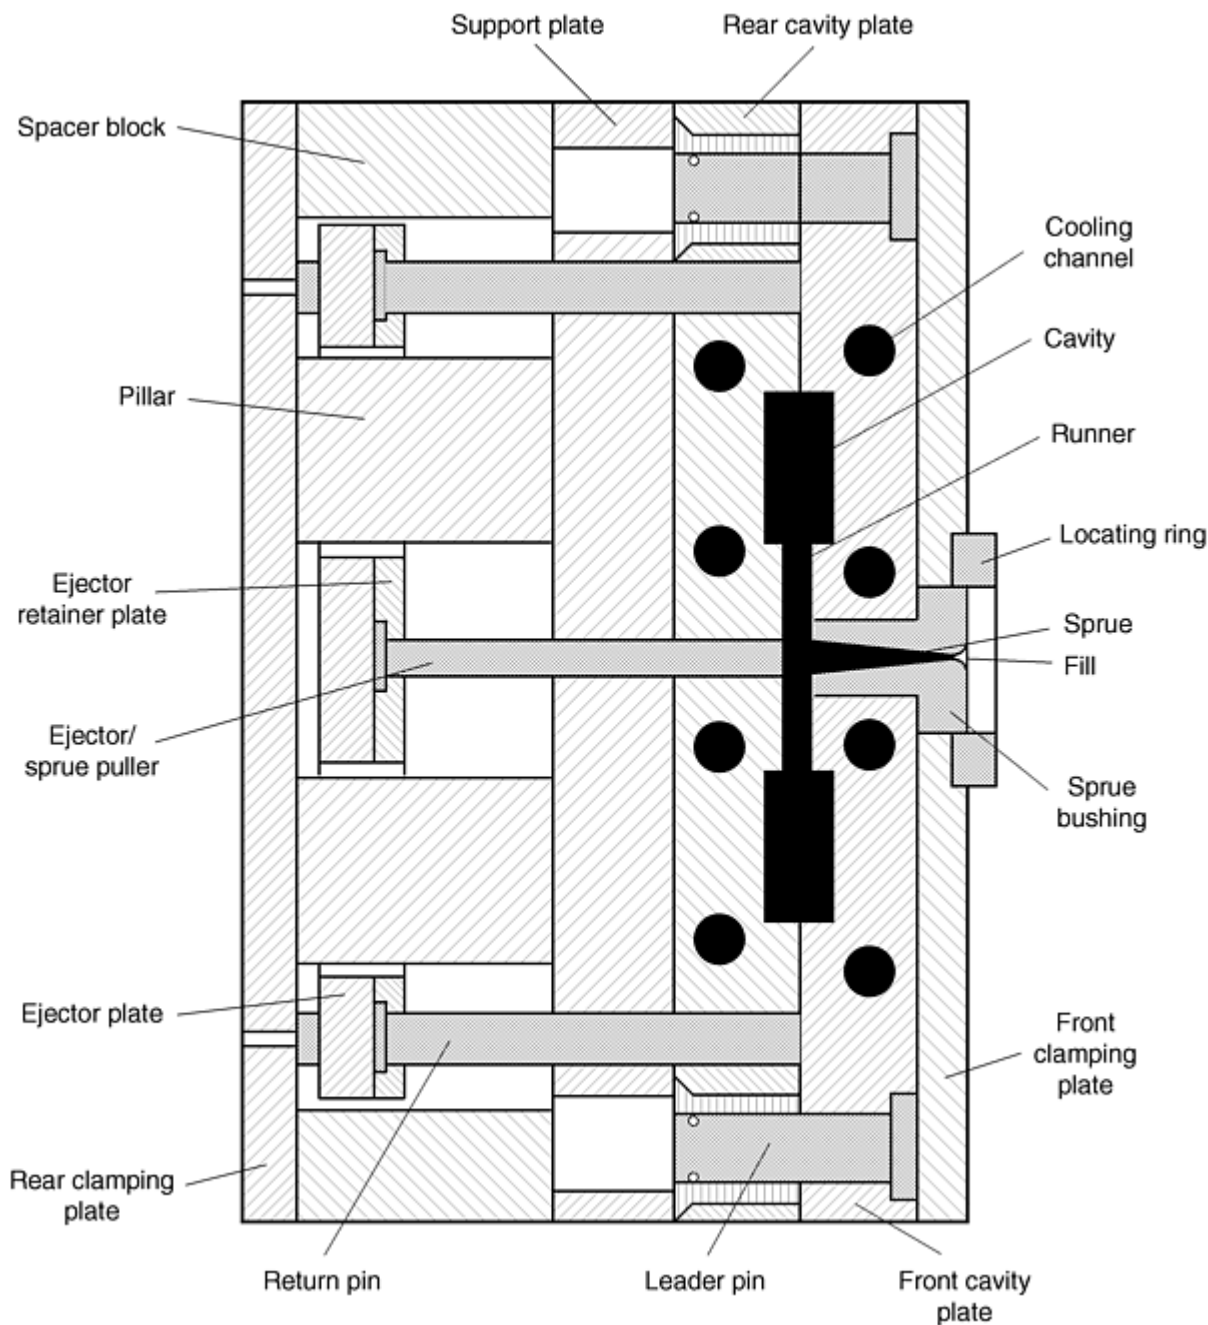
A sketch of the tool set for powder injection molding, showing major components
